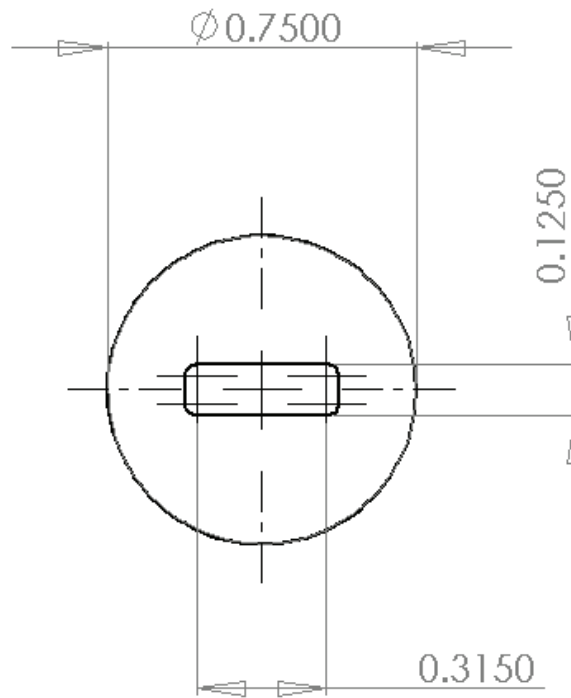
Mechanical drawing of the top view of the part *battery plug.sld
